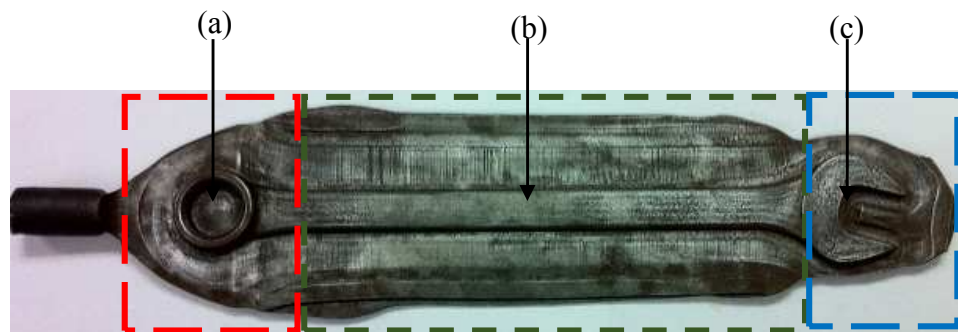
GBDF final forged platter for the existing wrench forging process. (a) Closed end, (b) Handle, and (c) Open end
